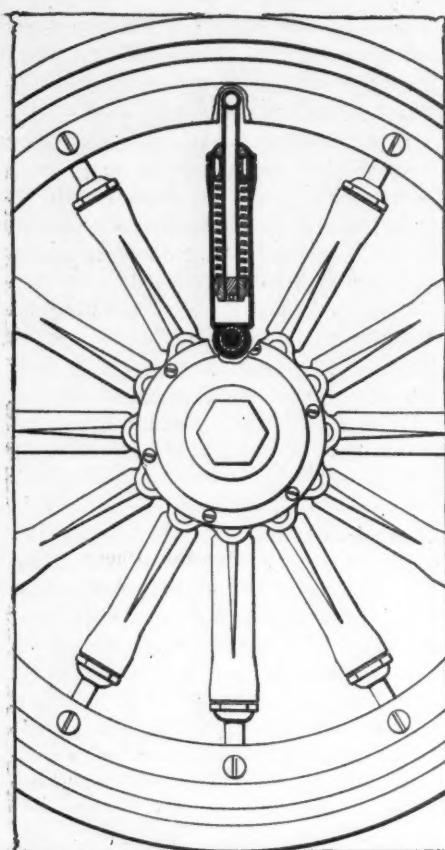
PECK SPRING WHEEL WITH SPOKE CUT AWAY
